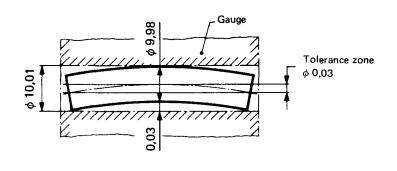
d) – Minimum material pin (ϕ 9,98) shown in gauge – Effective straightness tolerance ϕ 0,03
